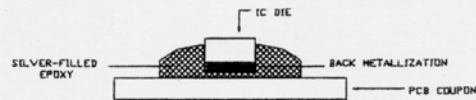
b: Die shear testing was performed on conductive epoxy die attaches to PCB coupons
